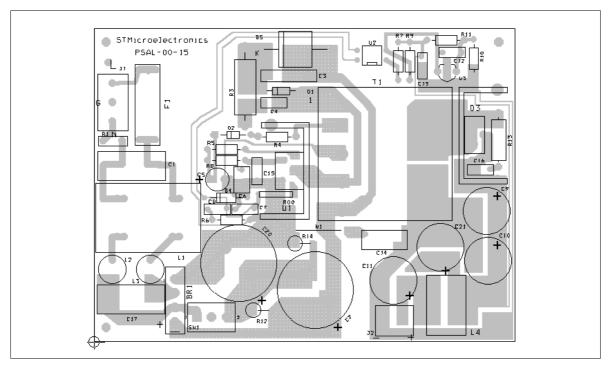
Pc Board Top Legend And Bottom Foil (112mm X 83mm Single sided)
